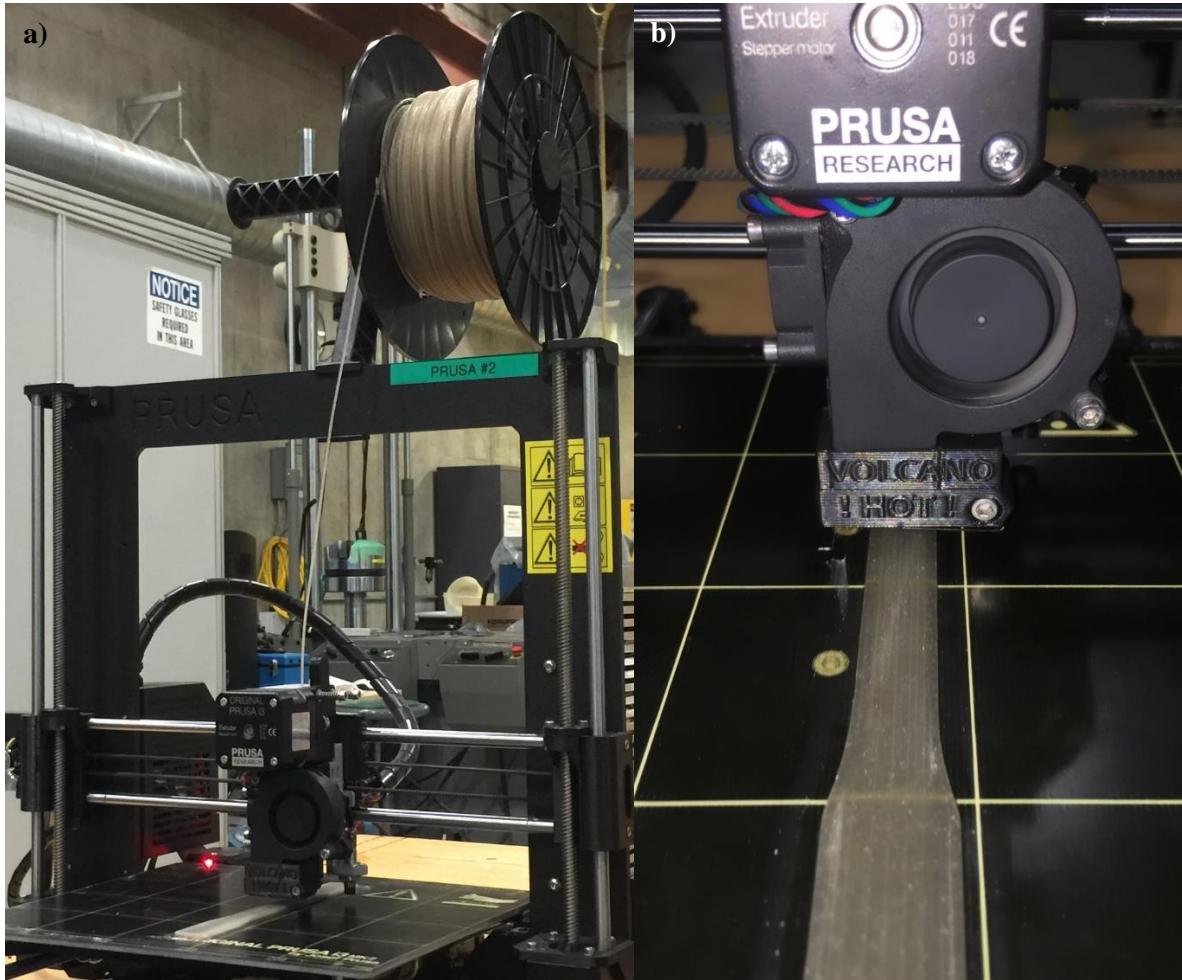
Coupon manufacturing: (a) Prusa Mk2 i3; and (b) closeup view of ASTM D638-14.
